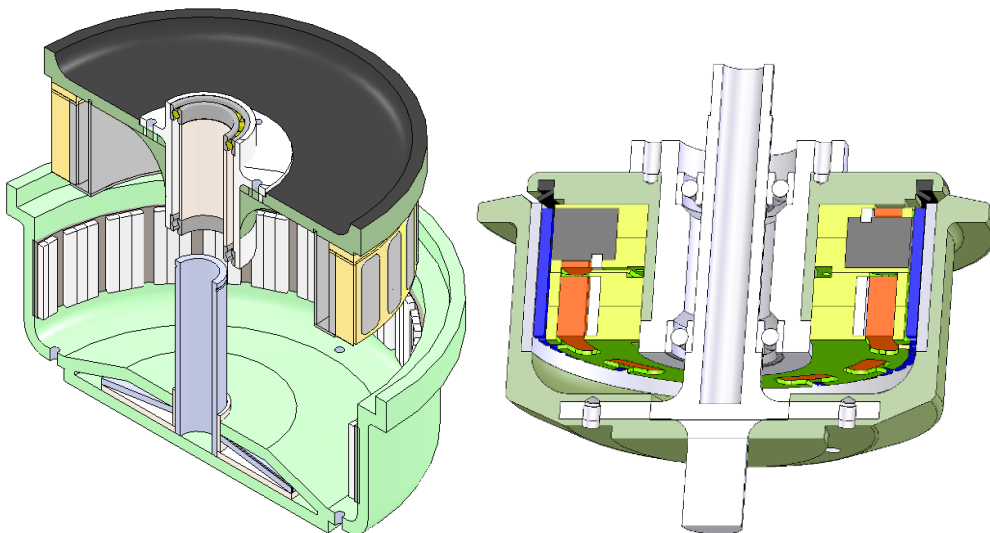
Prototyped machines: CAD drawing of W3 and W4
